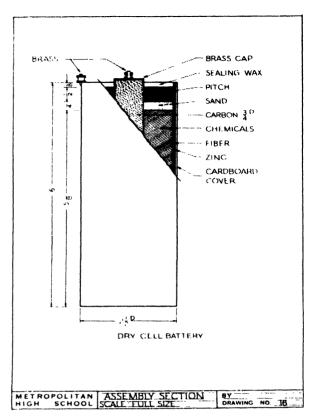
ASSEMBLY SECTION (PROBLEM)
